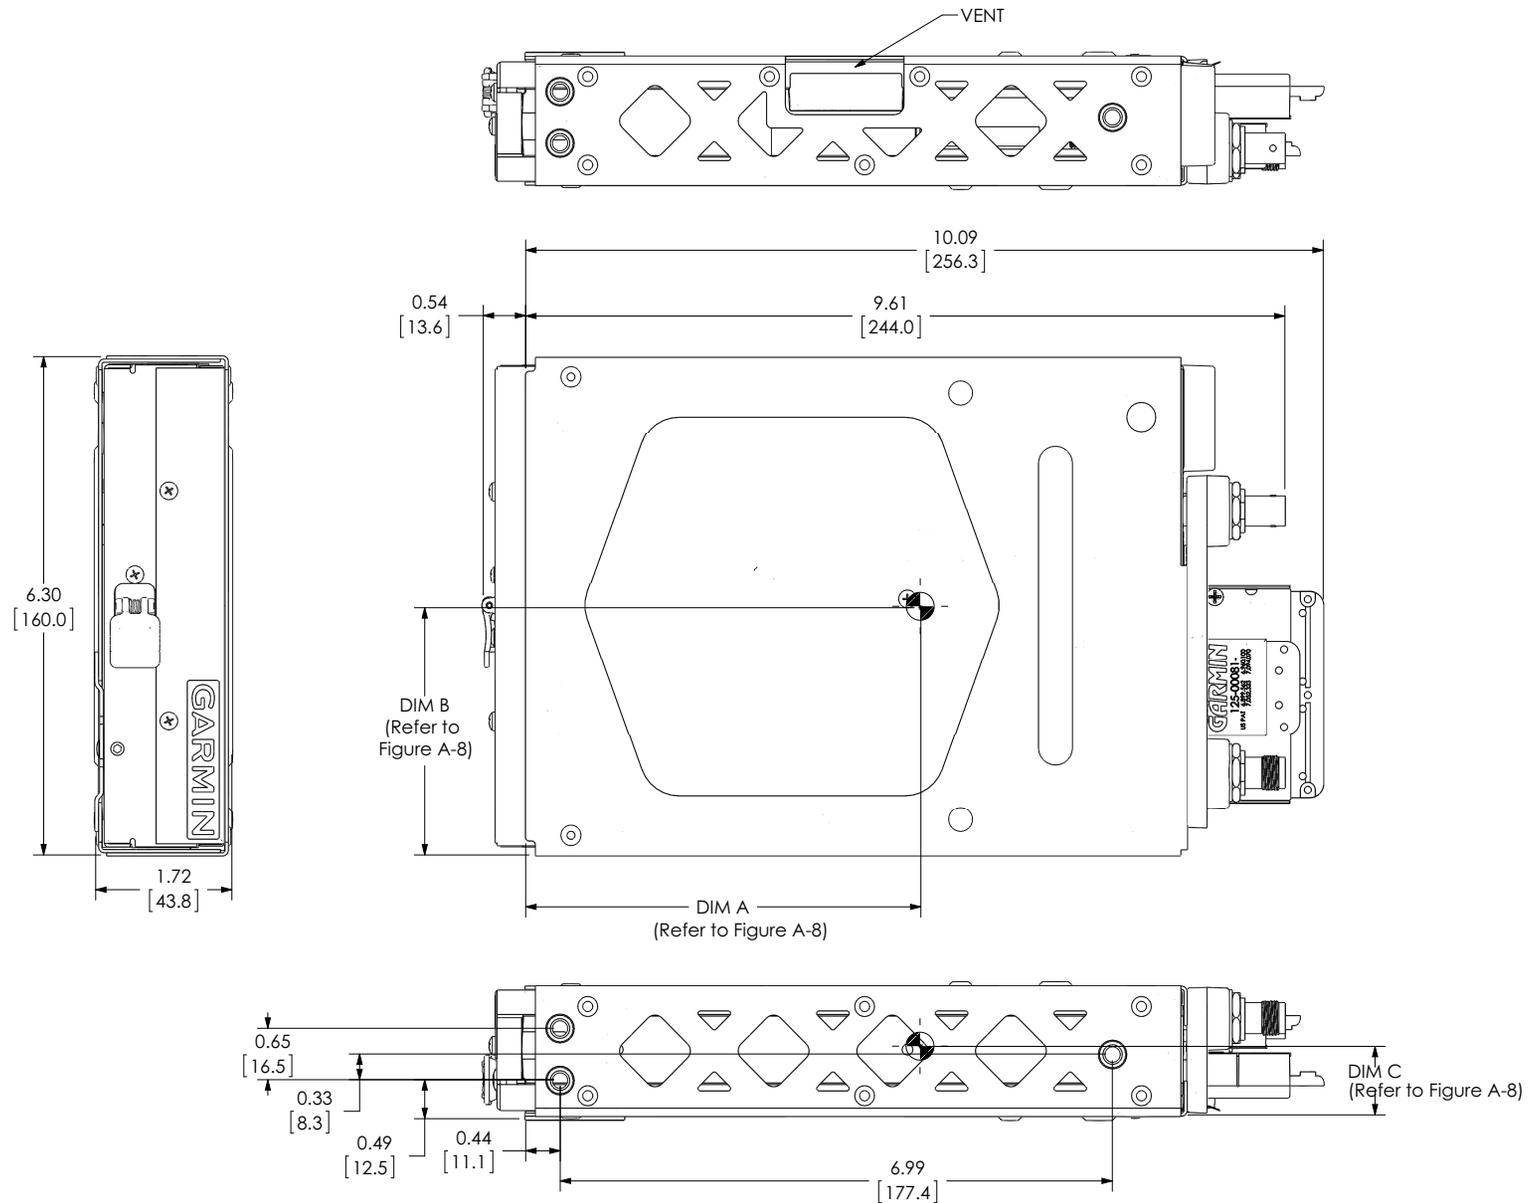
GTX 3X5 Panel Mount Rack Assembly
